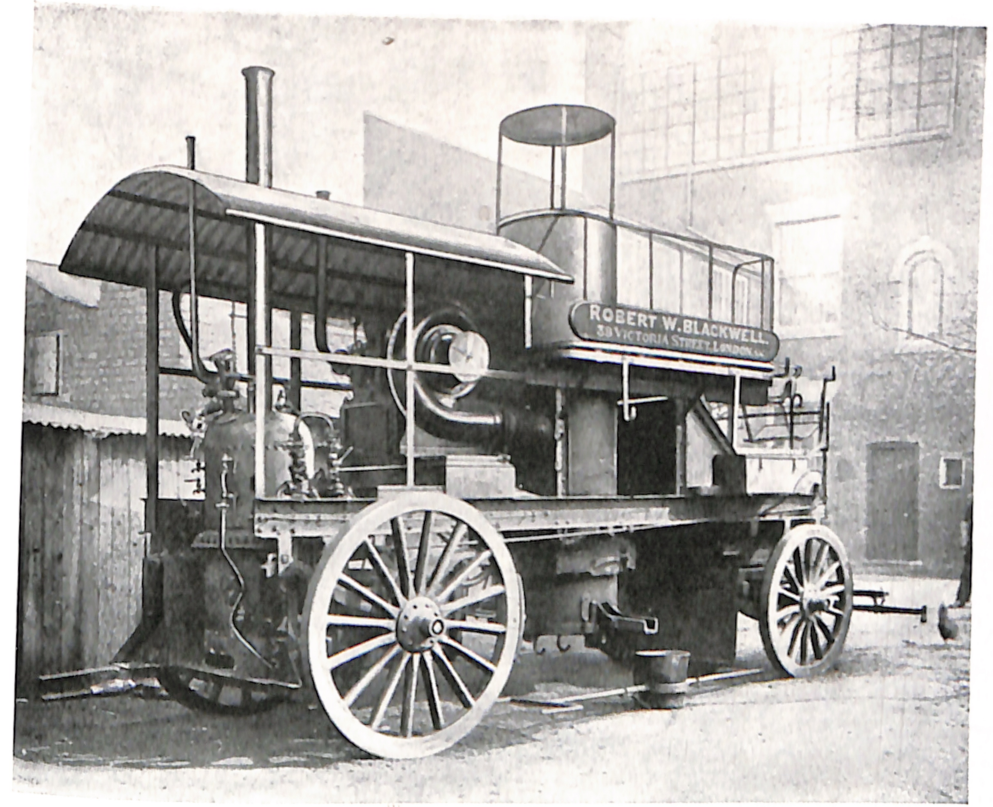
Cupola on Wheels, used in making the Falk Weld Joint
